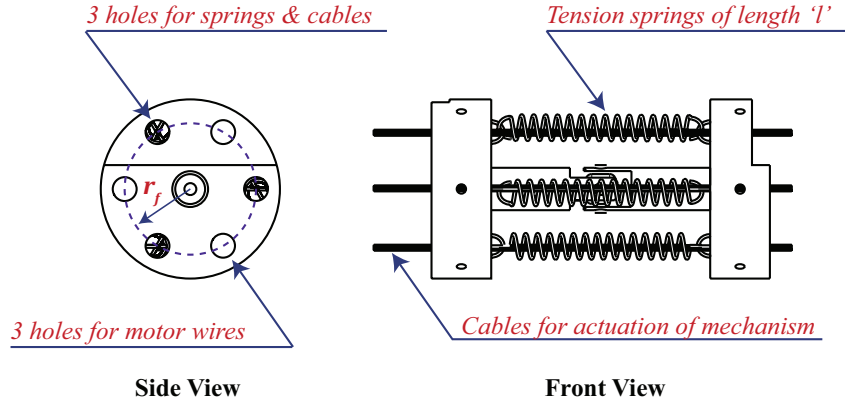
Proposed tensegrity mechanism with universal joint, springs and cables
